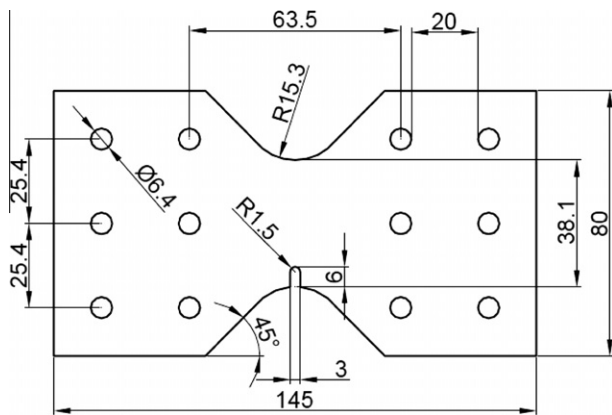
Geometry and dimensions of notched butterfly test specimen (in mm).
